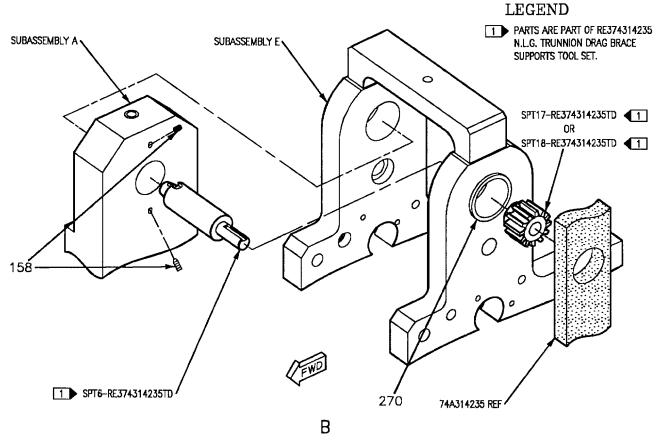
Support Final Reaming After Cold Working (Sheet 2)
